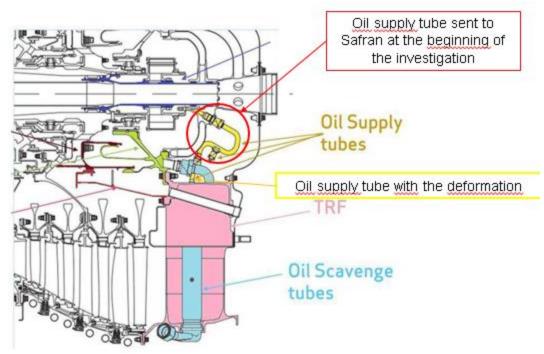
showing the position of the deformed oil supply tube and oil scavenge tube
